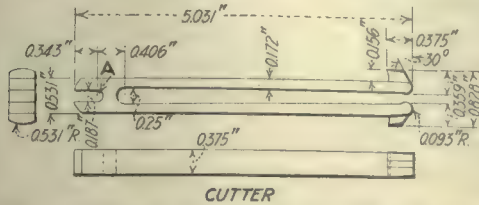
SLOTTING TOOL FOR BRAKE CRANKSHAFT
